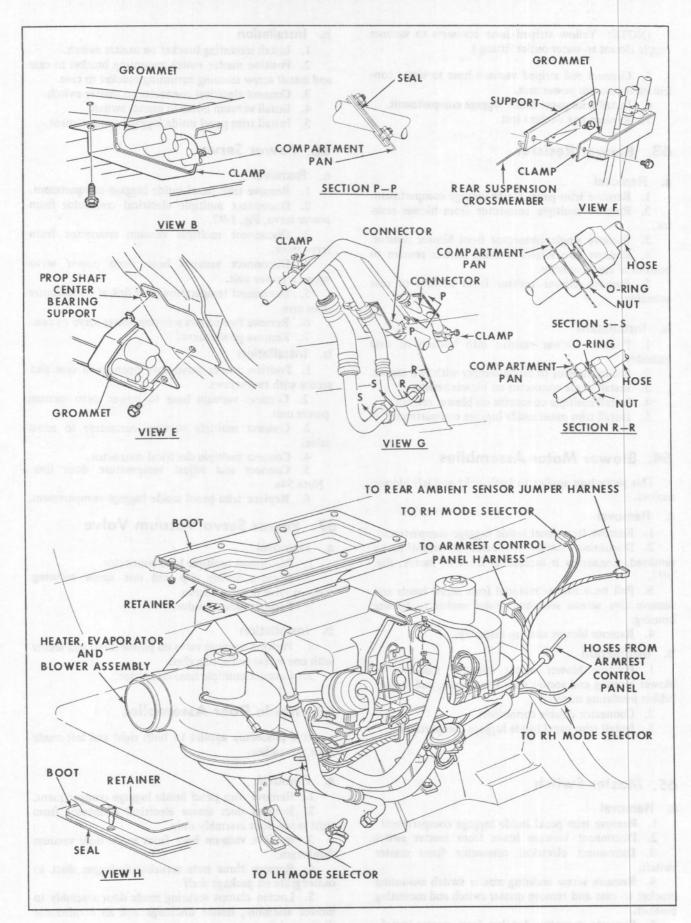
Rear Heater, Evaporator and Blower Assembly
